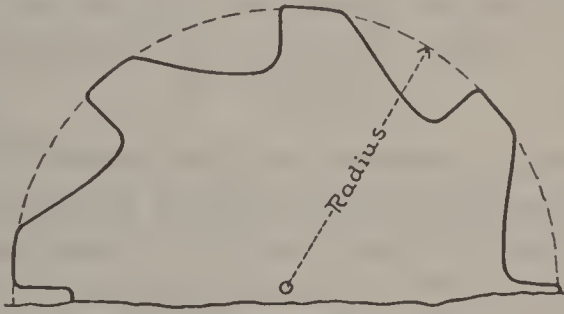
CROSS SECTION OF SOLID REAMER AFTER ROTARY GRINDING
